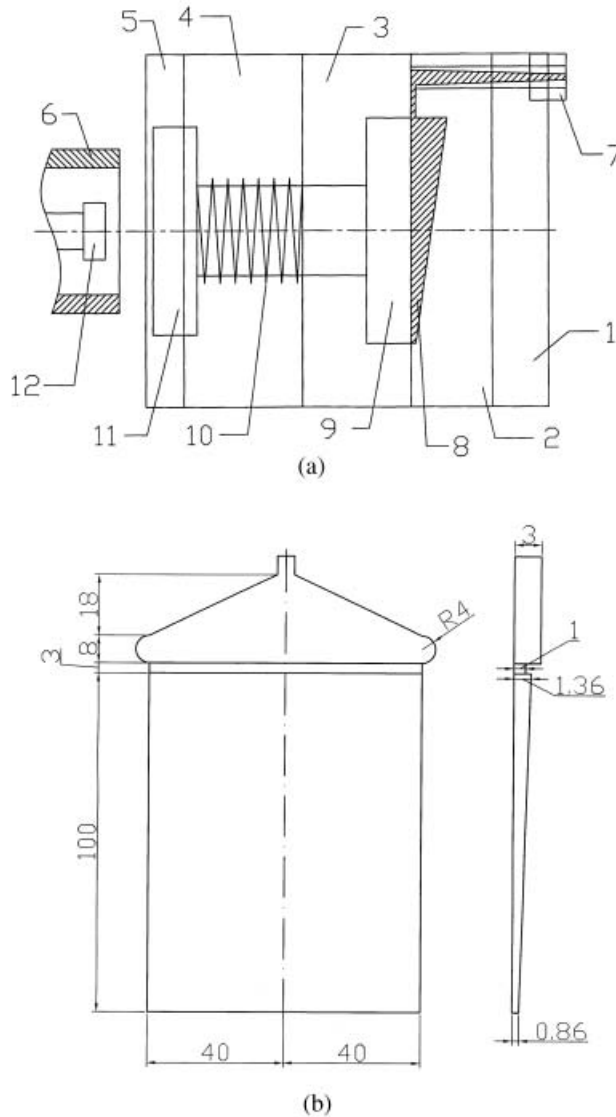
(a) Structure of the mold and the compression unit (1. clamp plate, 2. cavity plate, 3. core plate, 4. spacer, 5. clamp plate, 6. compression cylinder, 7. sprue bushing, 8. cavity, 9. compression plate, 10. spring, 11. compression plate, 12. plate for mounting compression mechanism) and (b) dimension of the wedge-shaped plate.
